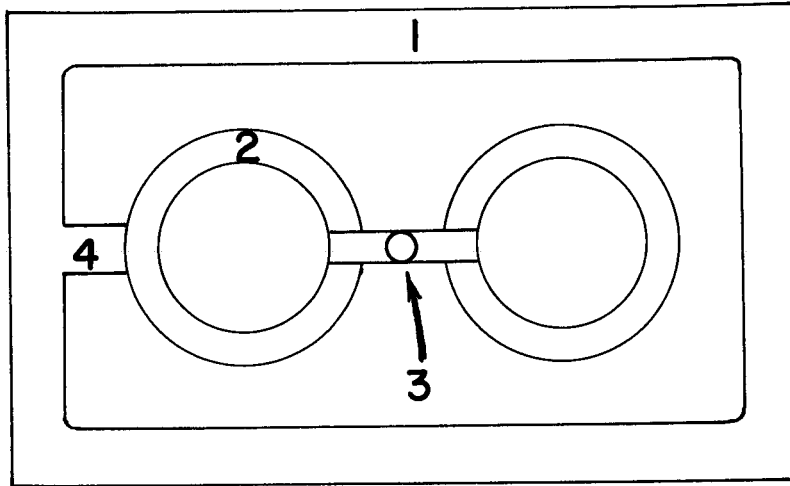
Top view of main chassis. 1 - recess for heat shield support, 2 - recess for receiver assembly, 3 - access for thermopile leads, 4 - access for heater leads (Full Scale).
